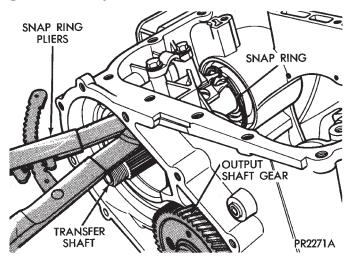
Transfer Shaft Bearing Snap Ring To install transfer shaft, reverse the above procedure.
